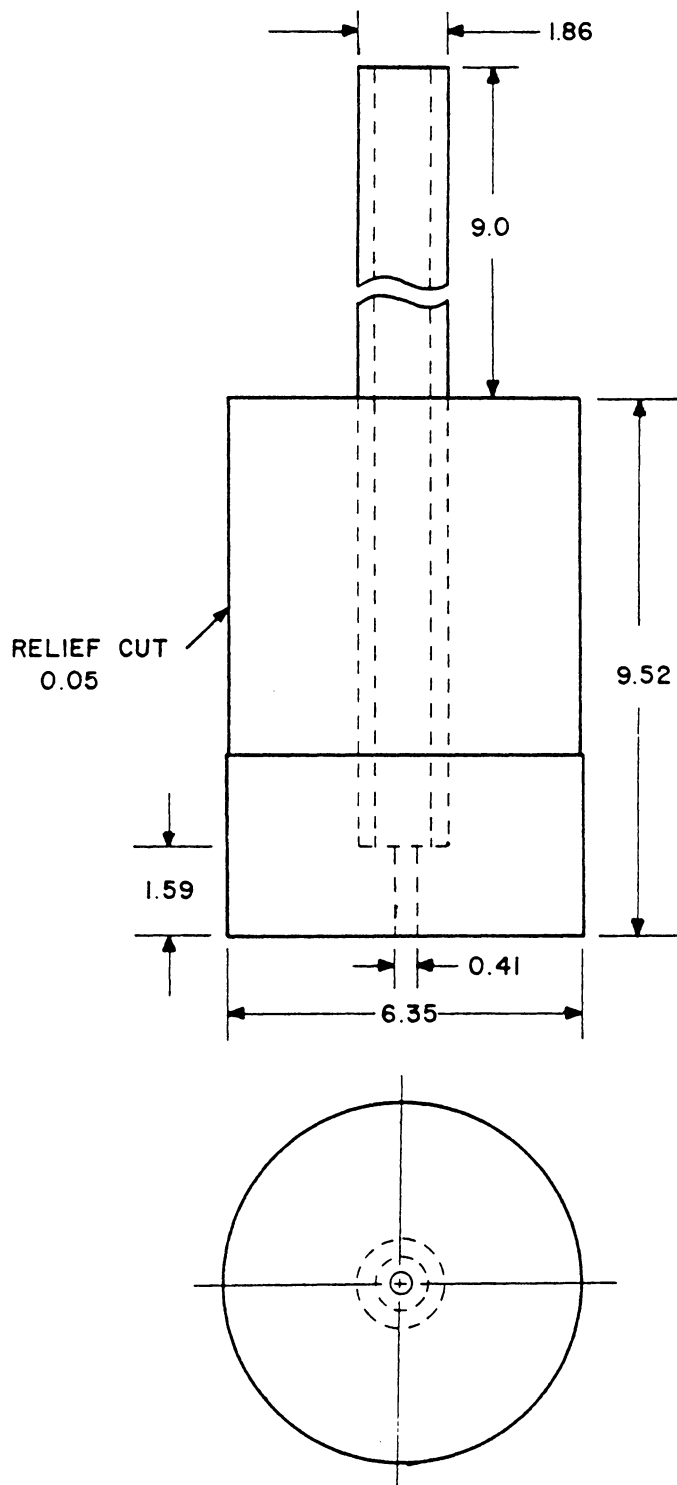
Static-pressure-port insert. All dimensions given in millimeters.
